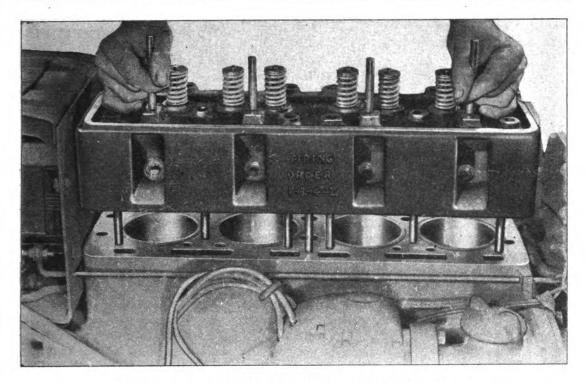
Removing Cylinder Head by Lifting Straight Up
